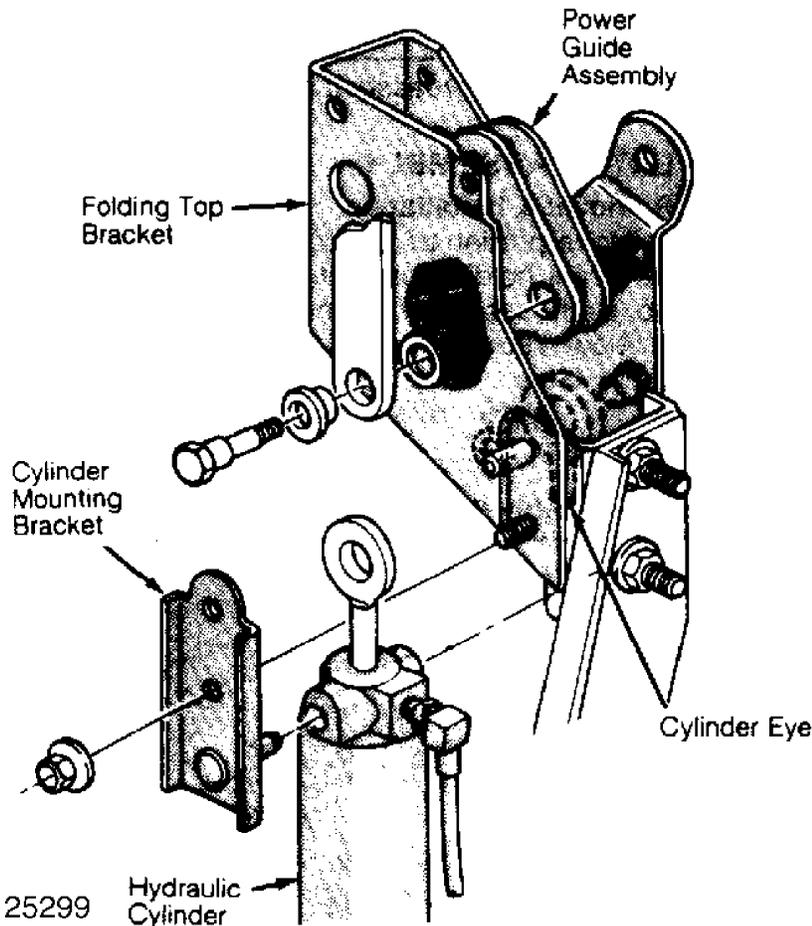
Hydraulic Cylinder & Mounting Bracket
